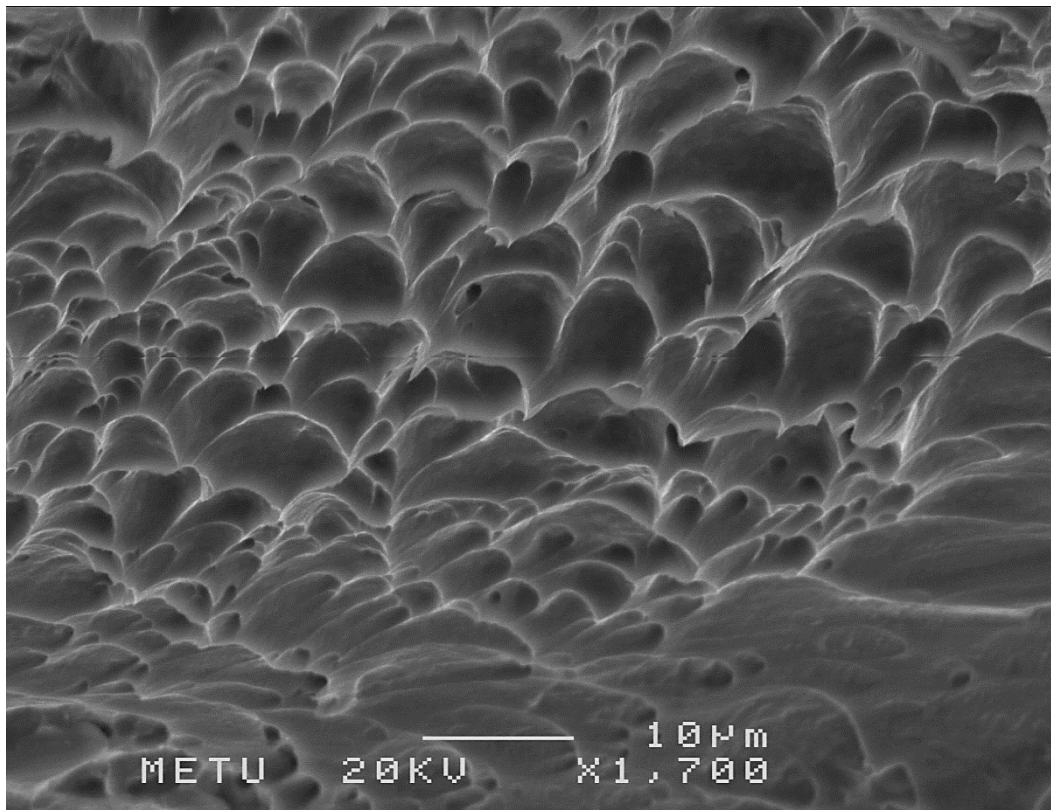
Angularly elongated dimples on the fracture surface. The evidence of the relation between the fracture plane and layers produced with 45° angle.
